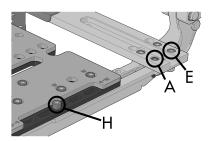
The front attachment (H), M4x20 (B) screw with the bushing and M6x20 (E) with the washer and lock nut at the rear attachment.
